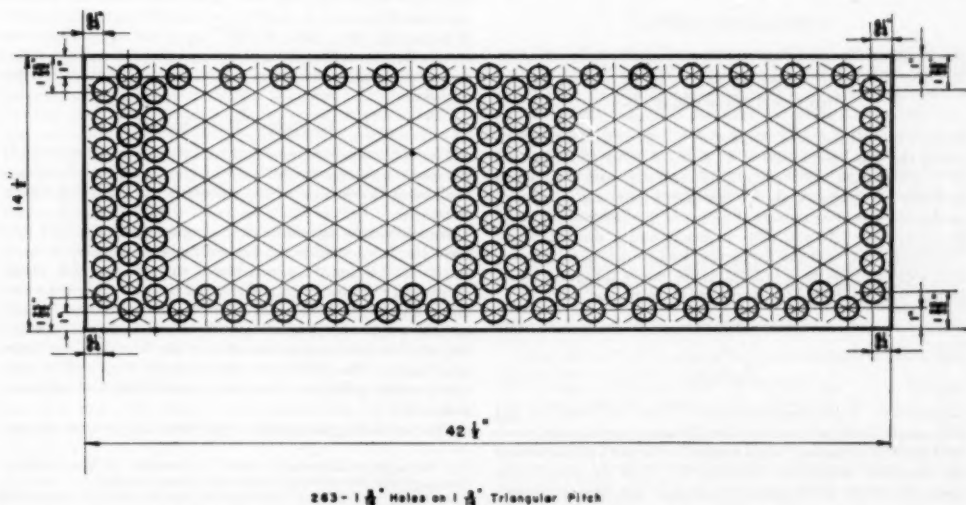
TUBE SHEET NO. 2, 42 1/8 IN. X 14 1/2 IN. X 0.246 IN., FOR EXPERIMENTAL TESTS
